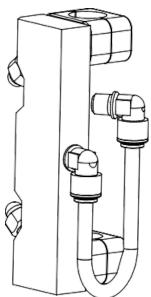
Gun Blow Off Manifold Assembly Kit Parts
